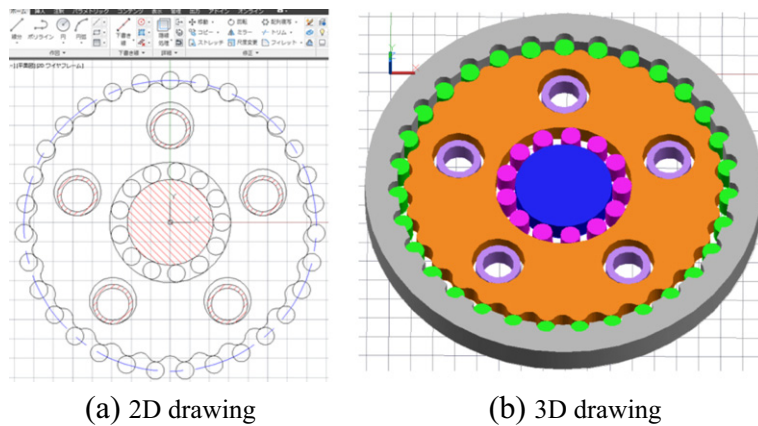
2D and 3D drawings of the trochoidal gear reducer.
